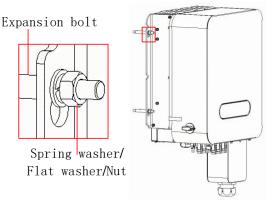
Schematic diagram of wall-mounted (hoop) installation
